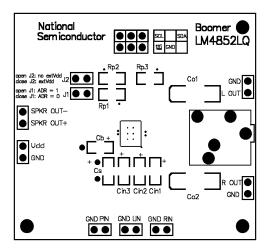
Recommended LQ PC Board Layout: Top Overlay Layer
